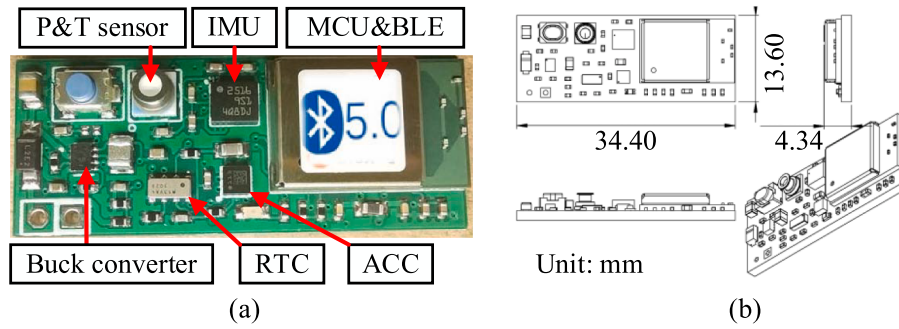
Designed WAWMS: (a) PCB board, and (b) dimensions.
